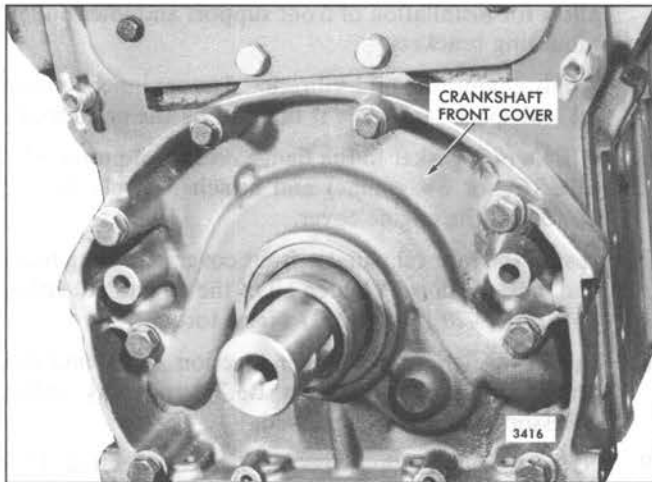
Engine Front Cover Mounting (6V-92 and 8V-92 Engines)
